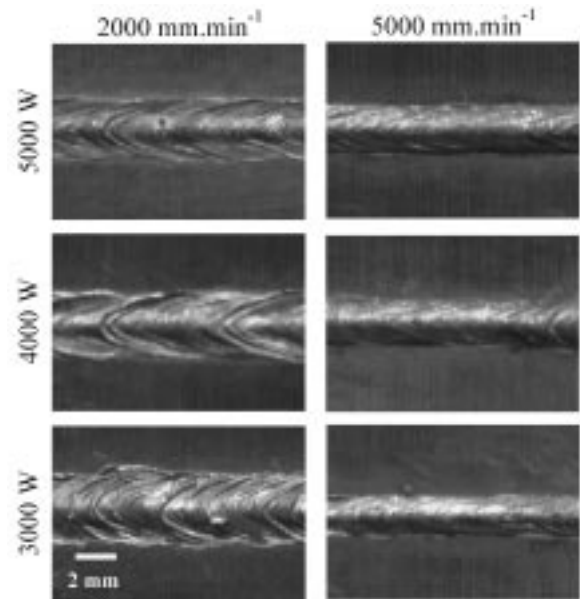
The weld surface patterns of AM50 welds produced under various combinations of beam power and beam speed
